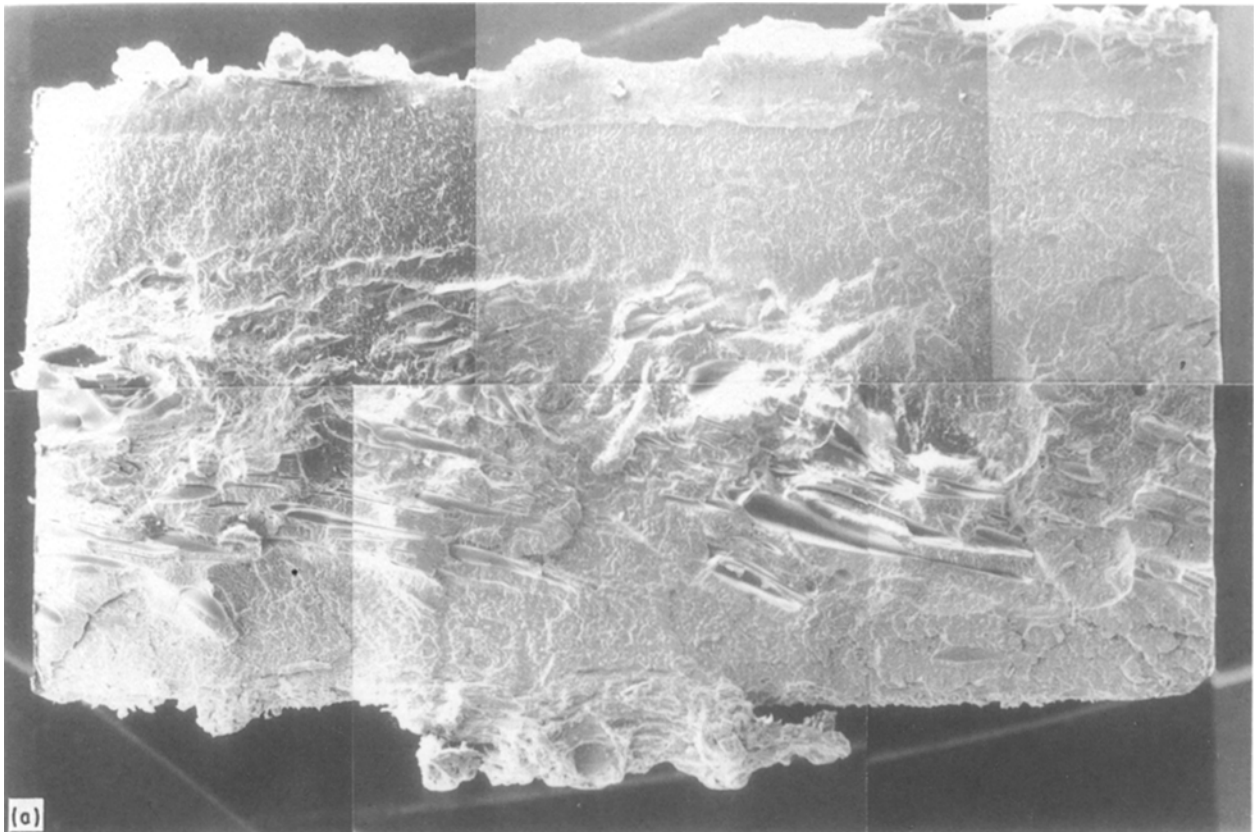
Fracture surfaces (6.35 mm \times 12.7 mm) of a 25% density reduction M-PPO-SF welded specimen (Specimen 2: $p_0 = 0.9$ MPa, $\eta_F = 0.33$ mm).
